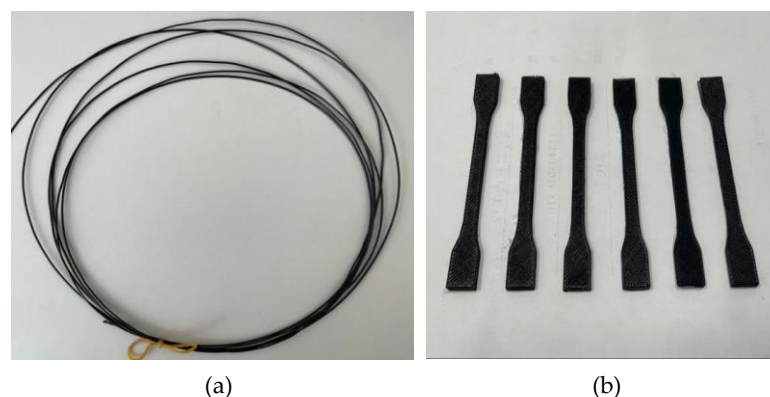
3D Printing composite tensile spline (a) Nylon-6/CNT composite wire (b) Composite 3D printed tensile parts
